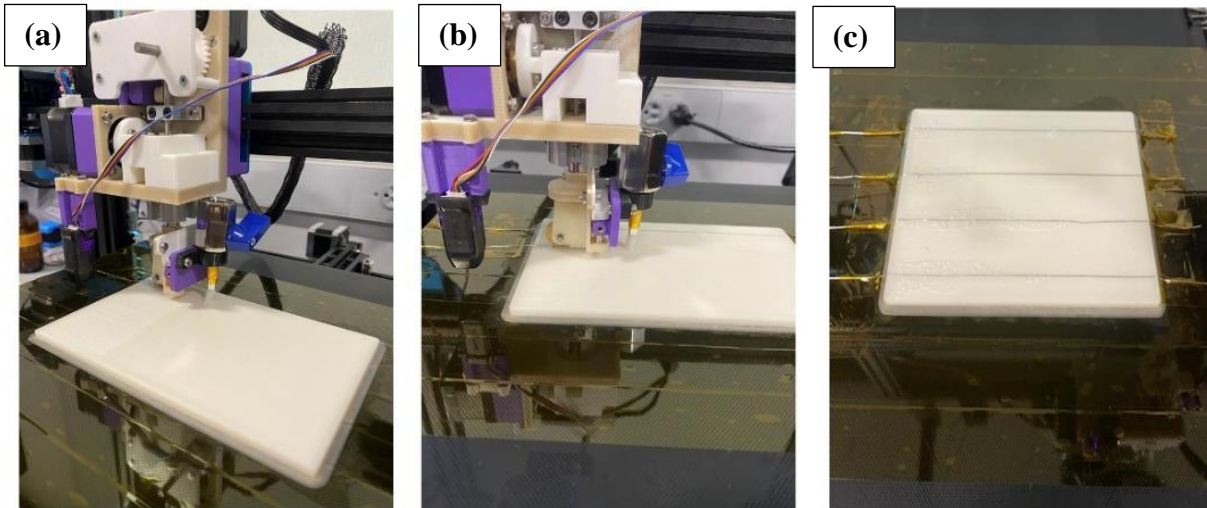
Step-by-step 3D printing and wire embedding process for the self-heating mold: (a)after printing the substrate part, the deposition of DCM onto 3D printed PLA was performed using solvent dispenser (b) simultaneous wire embedding was performed on the swelled substrate, (c) completed the self-heating mold manufacturing with wire embedding process.
